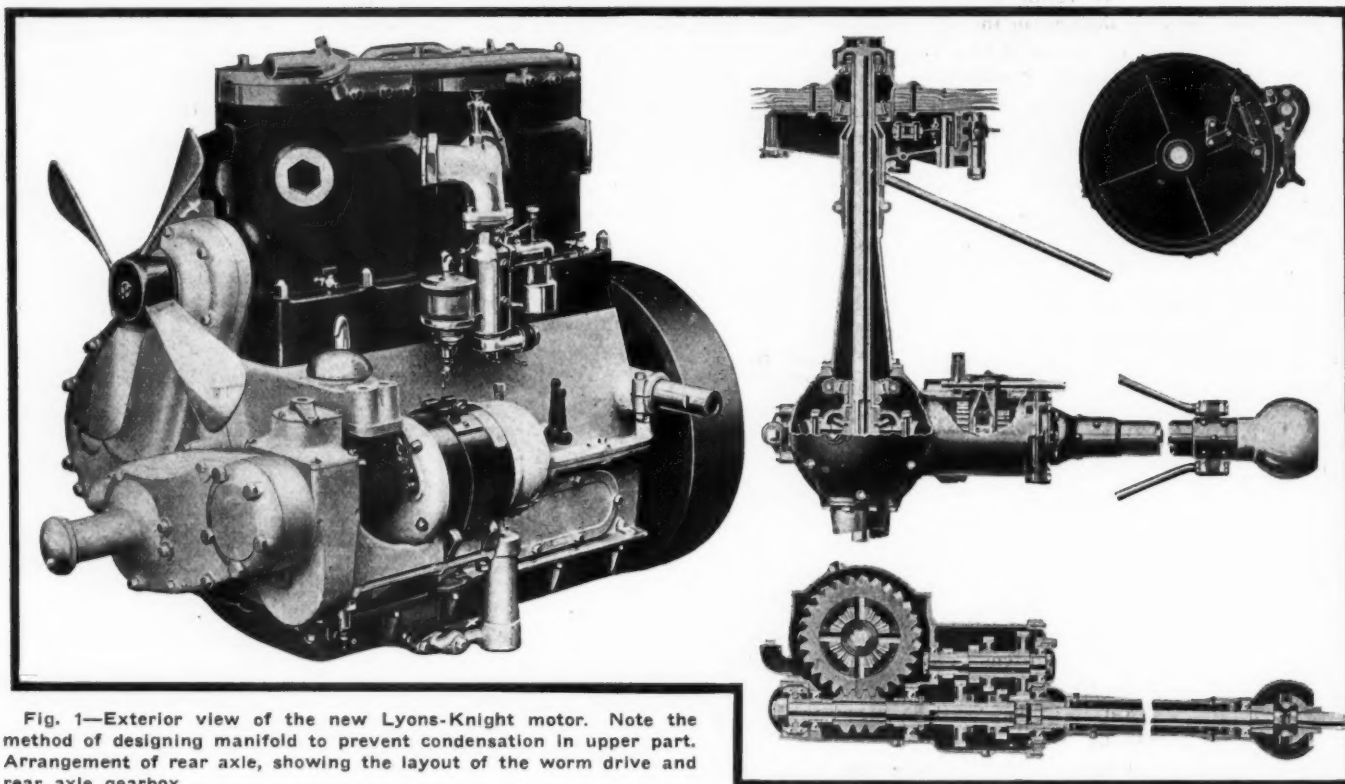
Exterior view of the new Lyons-Knight motor. Note the method of designing manifold to prevent condensation in upper part. Arrangement of rear axle, showing the layout of the worm drive and rear axle gearbox
